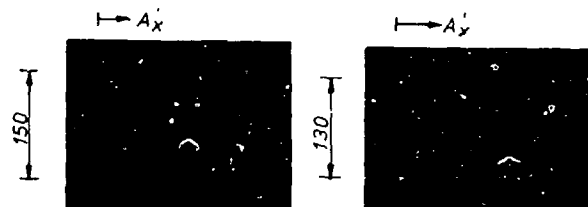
Compound scan imaging of a cylindrical side drilled hole and a bottom hole with 32° cone.
